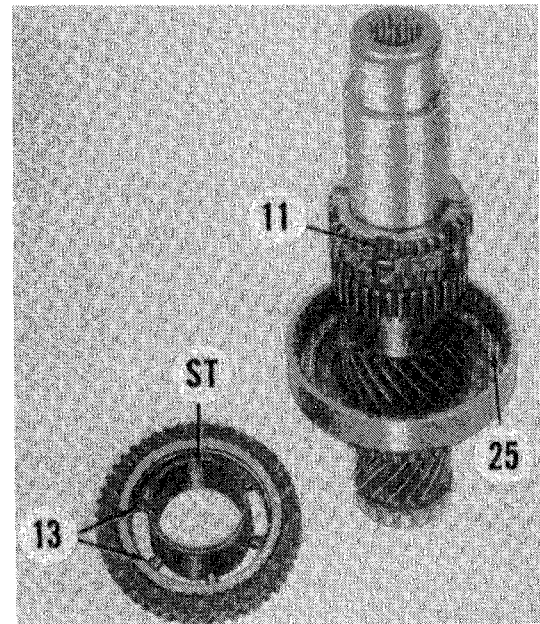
A—On Model 4650, use JDT-31 special tool (ST) to hold detent balls and springs in place when installing blocker assembly.
